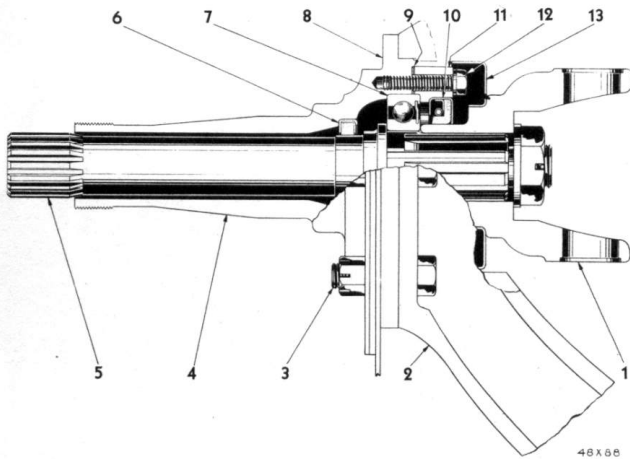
Sectional View of Rear Wheel Drive Shaft Arrangement
